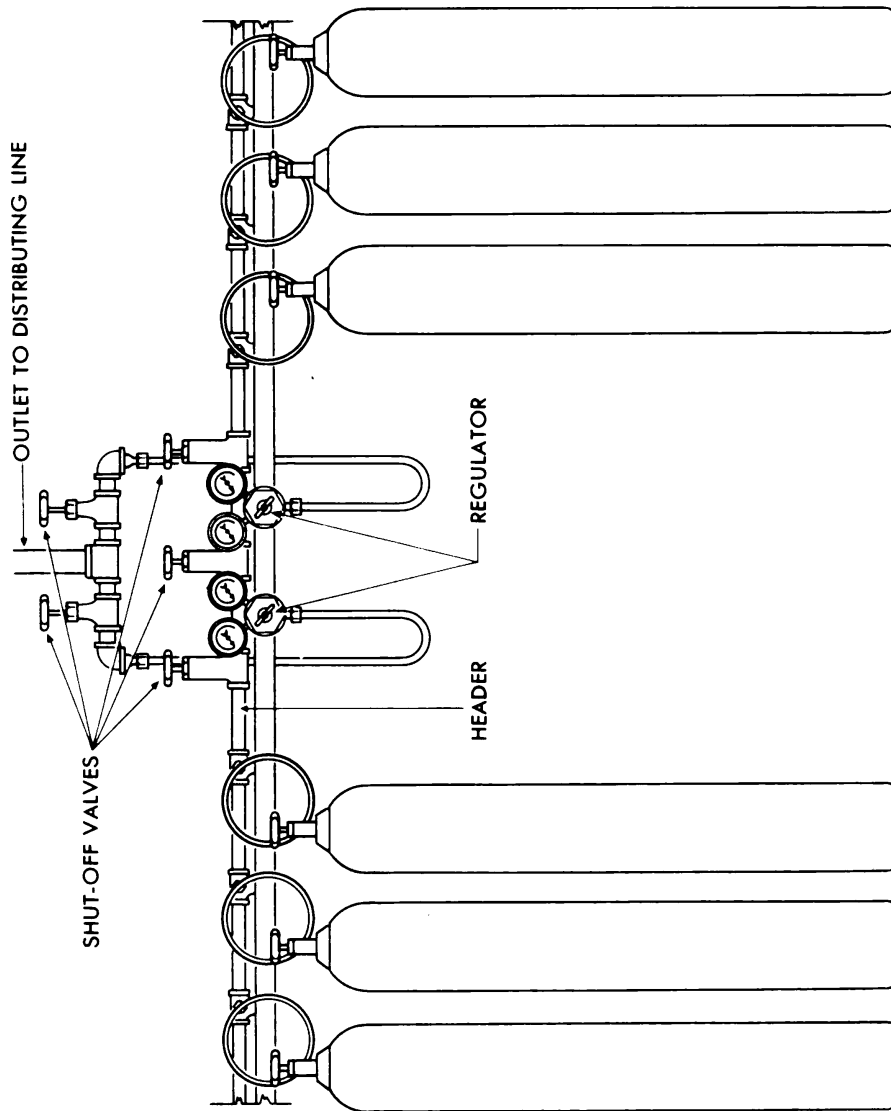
Oxyacetylene Welding and Cutting Outfit
